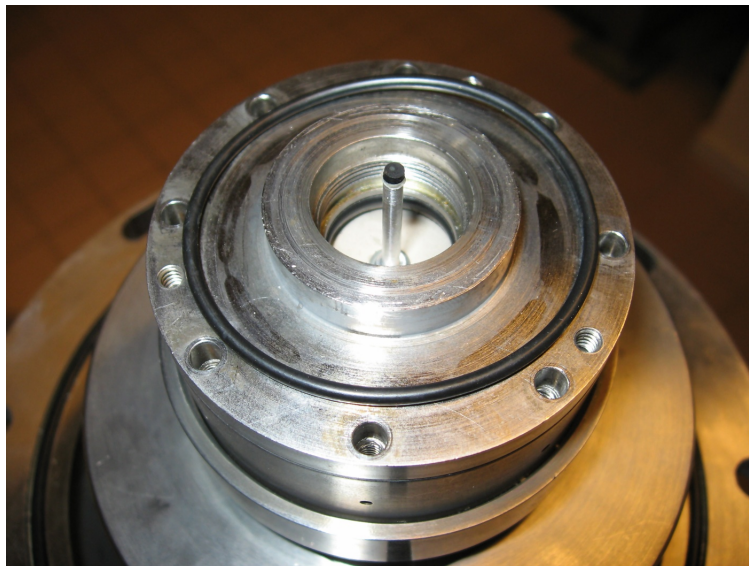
The outer ring was removed. The O-Ring is necessary to have the next part in the right height.
